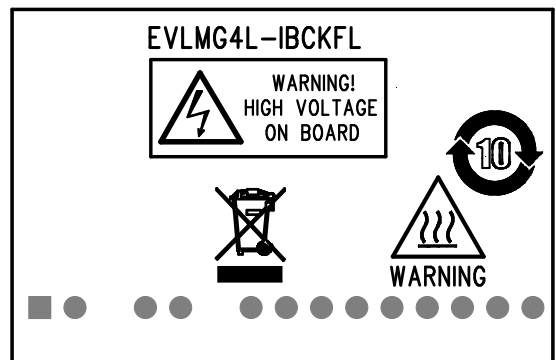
Daughterboard PCB layout - 4 Layer FR4 (inner 2)
